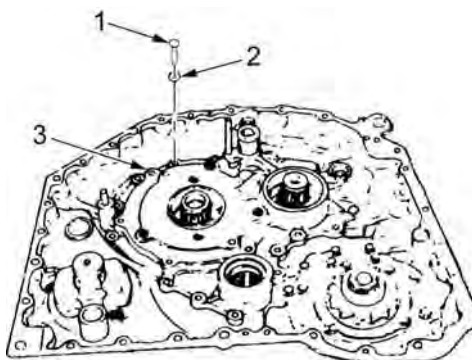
Right Cover Assembly Hardware Removal from Left Brake Support.
